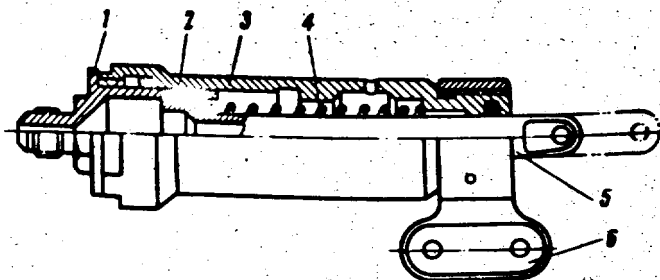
DRAG CHUTE DROPPING CYLINDER.
